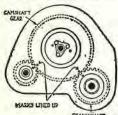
Note the crankshaft gear mark which meshes with the camshaft gear mark. On the left side a mark on the camshaft is meshed with a mark on the gear which drives a magneto and which must be timed the same as the camshaft. The magneto, however, is usually timed or set by loosening its coupling from the shaft with which it connects. See Index under "Setting the magneto."
